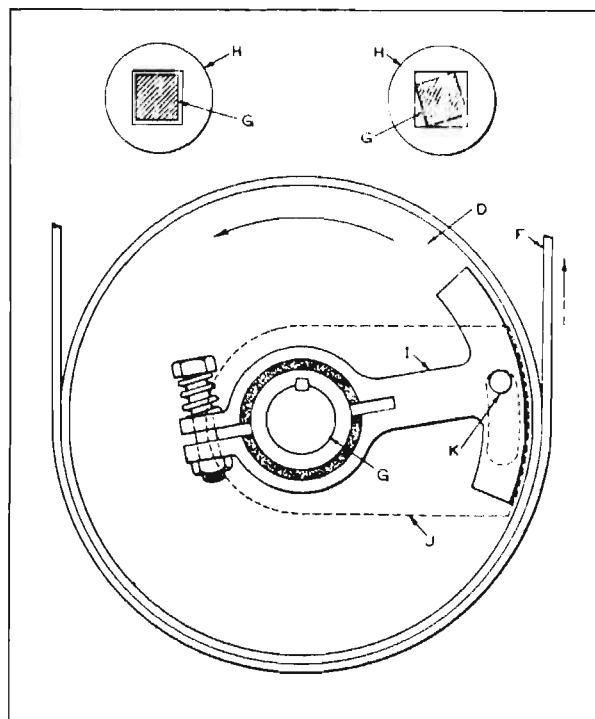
(Top) Diagrams Showing Shaft *G* in Unlocked and Locked Positions in Gear *H*; (Bottom) Mechanism for Unlocking Shaft *G*.
